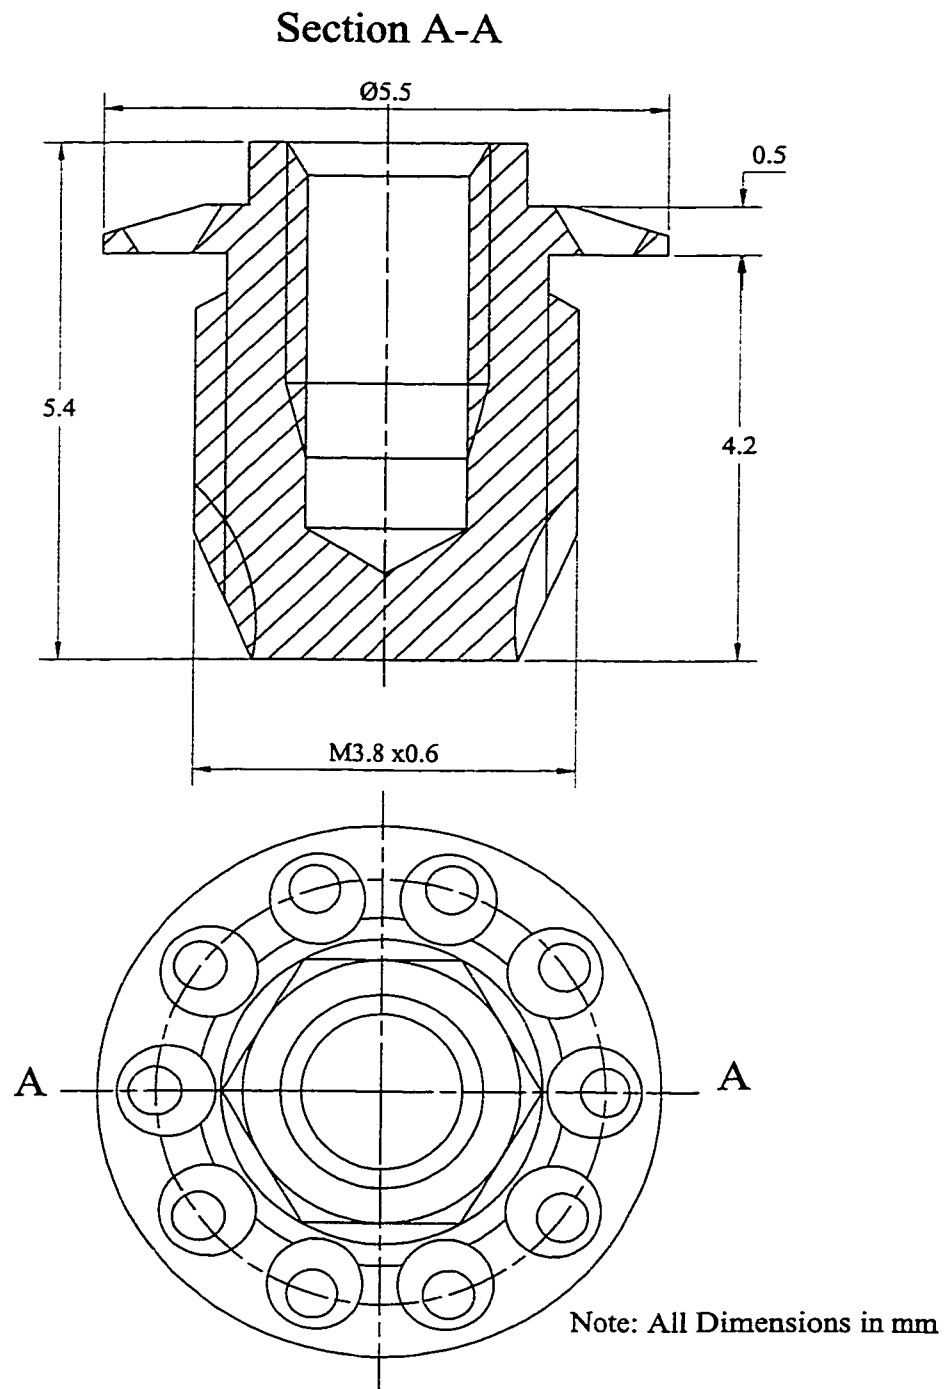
Typical 4mm Brånemark Flanged Implant Detail
